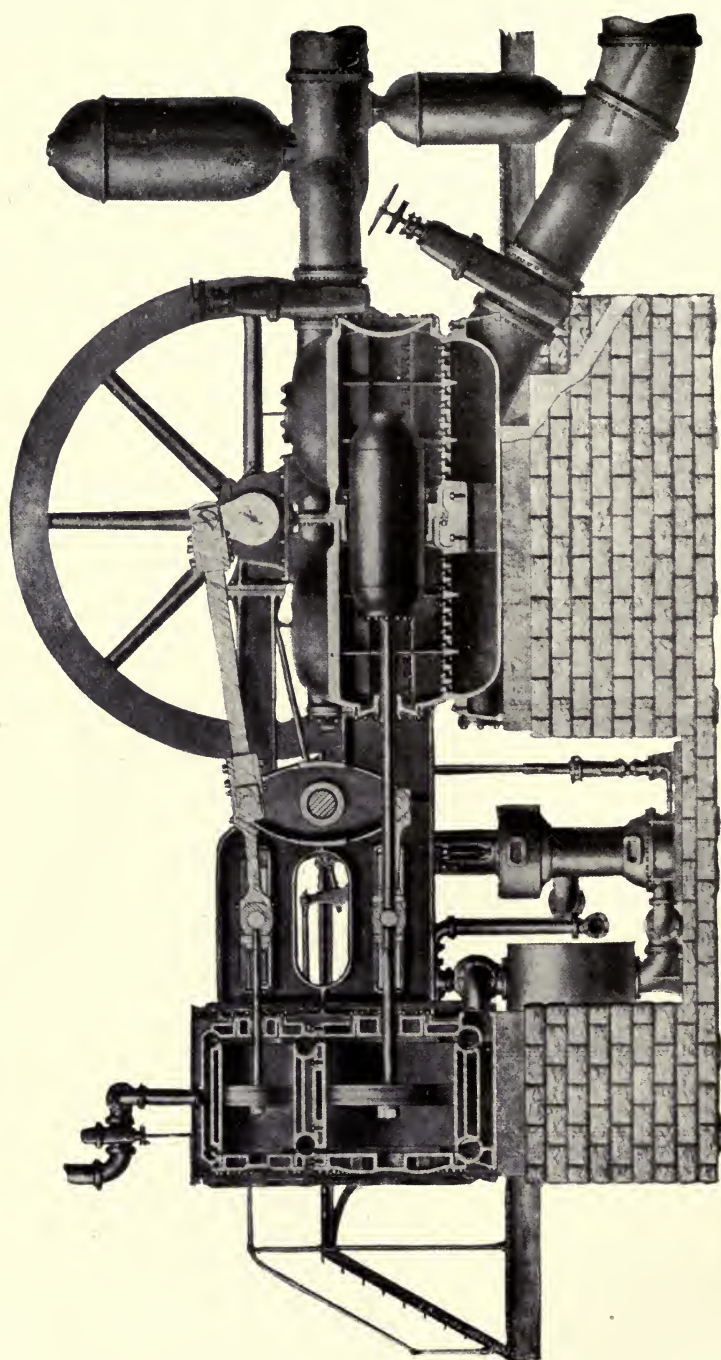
Latest Gaskill Horizontal Compound Pumping Engine.
